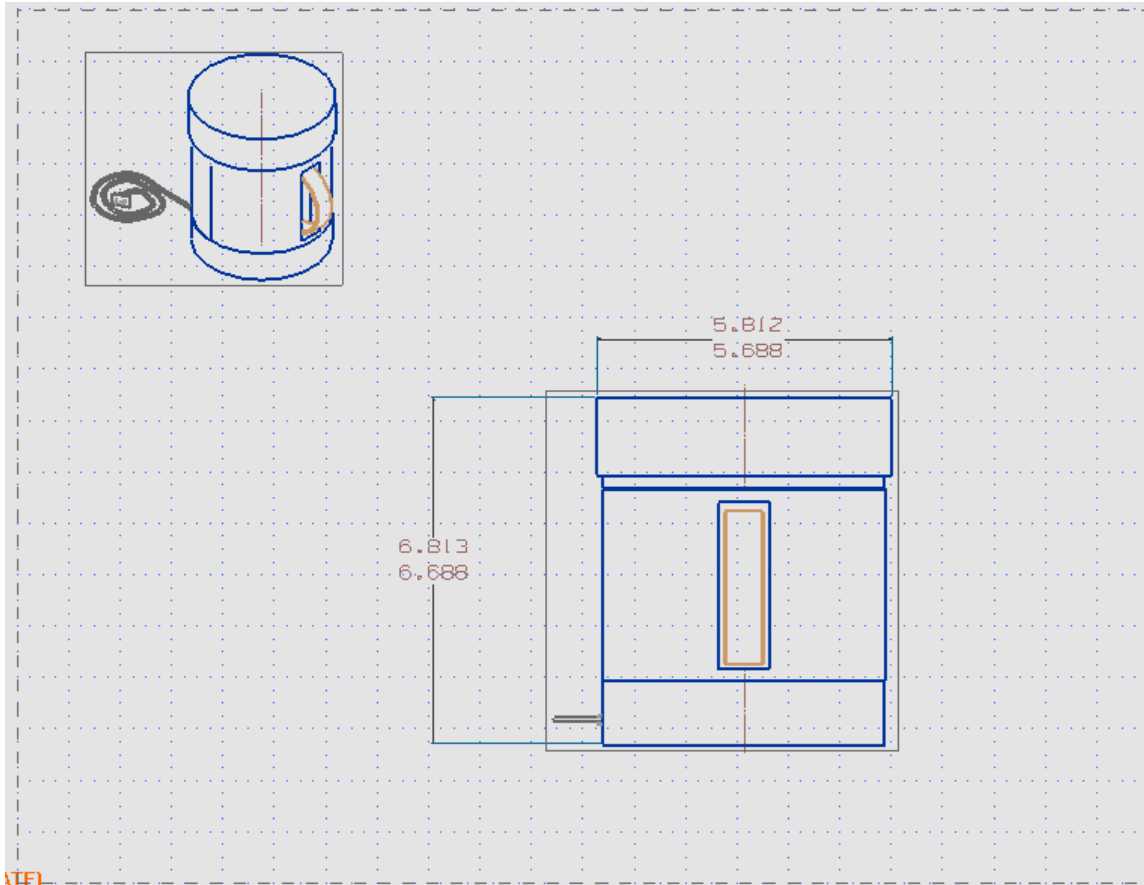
Engineering Drawing of Coffee Maker Assembly
